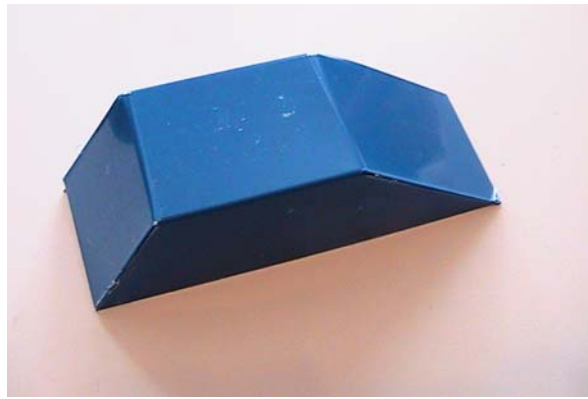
Well planned cutting enables you to make the car chassis in one piece.
